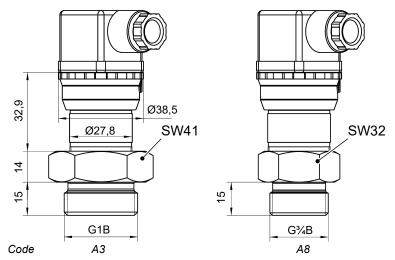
'Near flush-mounted front sensor' dimensional drawing
